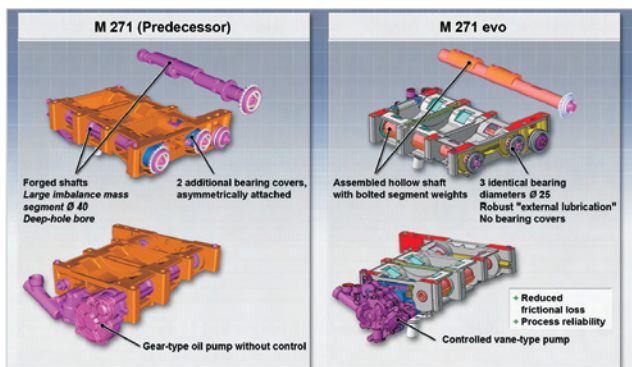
Lanchester Assembly of the M271 evo and Predecessor Engine [DAIMLER]
